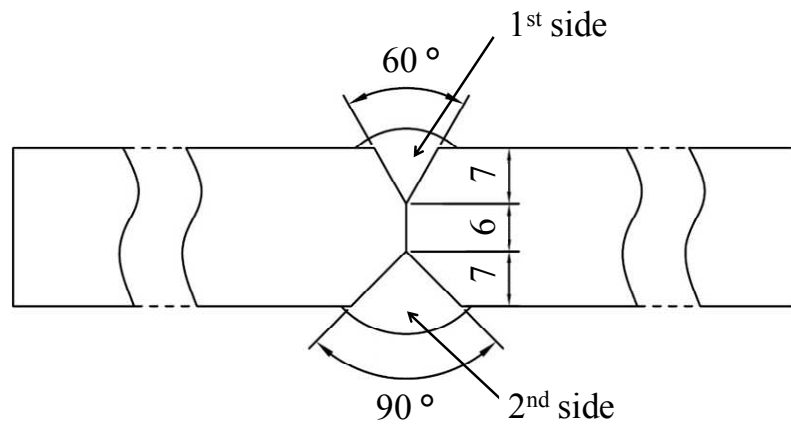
Joint geometry of weld coupons. (All dimensions in mm)
